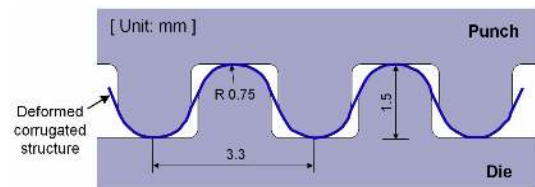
Schematic view of the shape and dimension of the mold-matched punch and die, deformed corrugated structure from a blank sheet.
